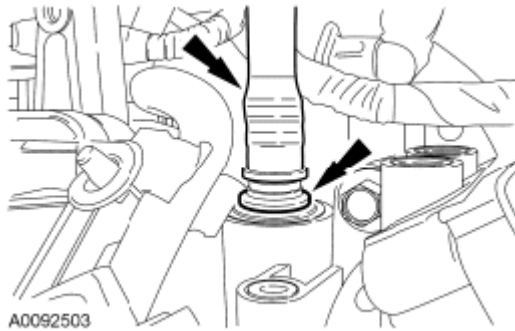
Locating Quick Connect Locking Ring And Vacuum Supply Hose
